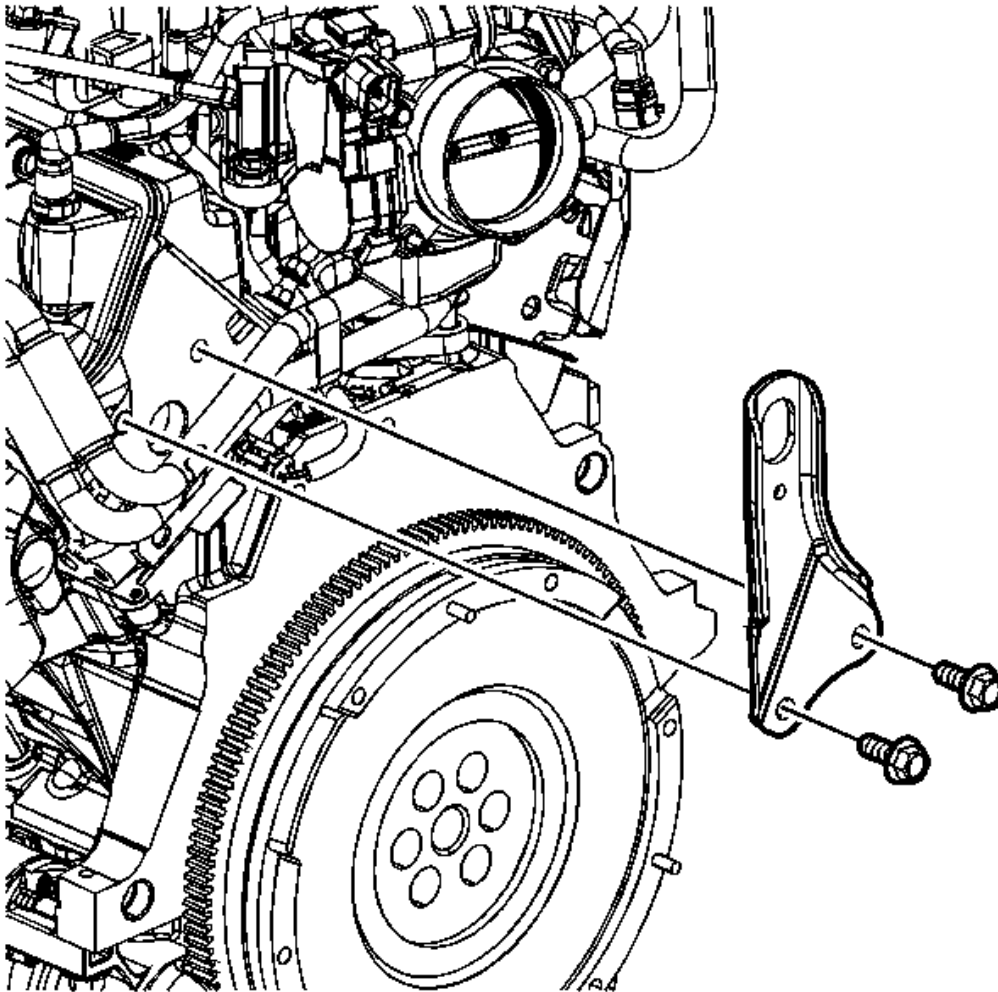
Identifying Rear Engine Lift Bracket & Bolts
